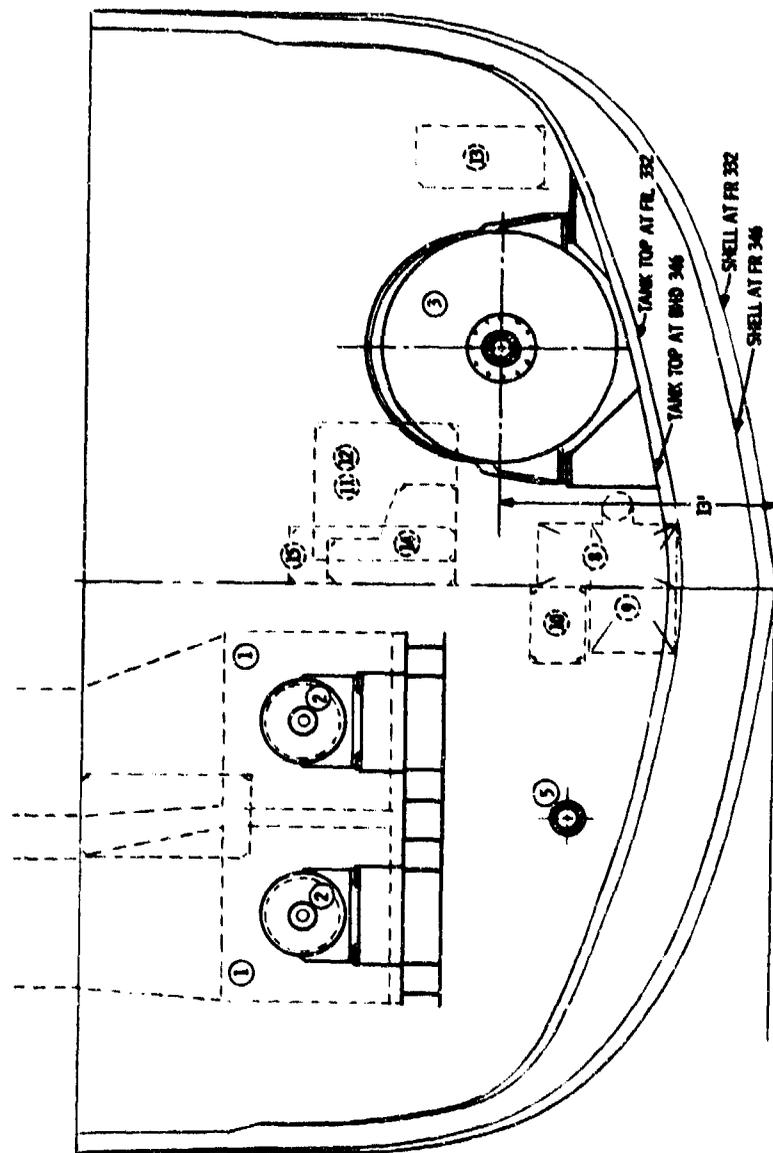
Machinery Arrangement in Destroyer, Aft Engine Room, Section
